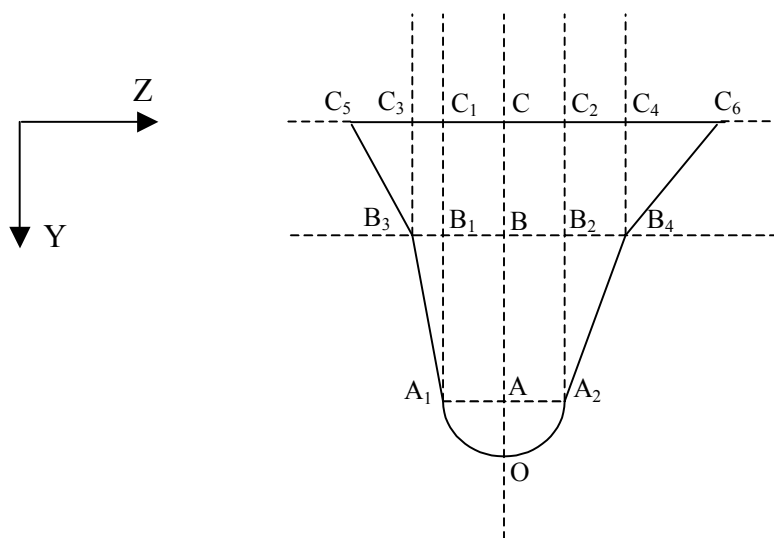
Schematic Representation of the Cross Section of the Alloy 22 Weld
